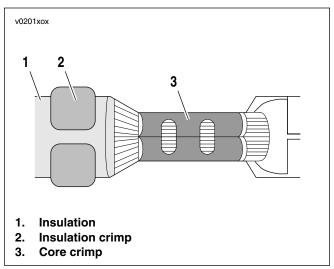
Inspect Core and Insulation/Seal Crimps
